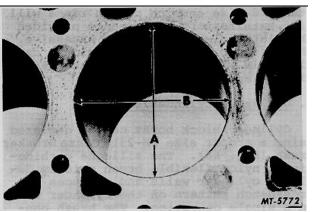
Checking Cylinder Bore Using Dial Bore Gauge SE-2331
